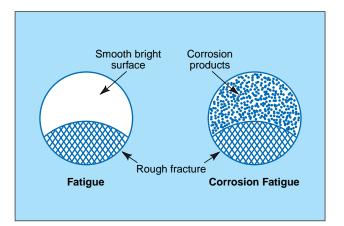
Schematic illustration of fatigue and corrosion-fatigue failures.
